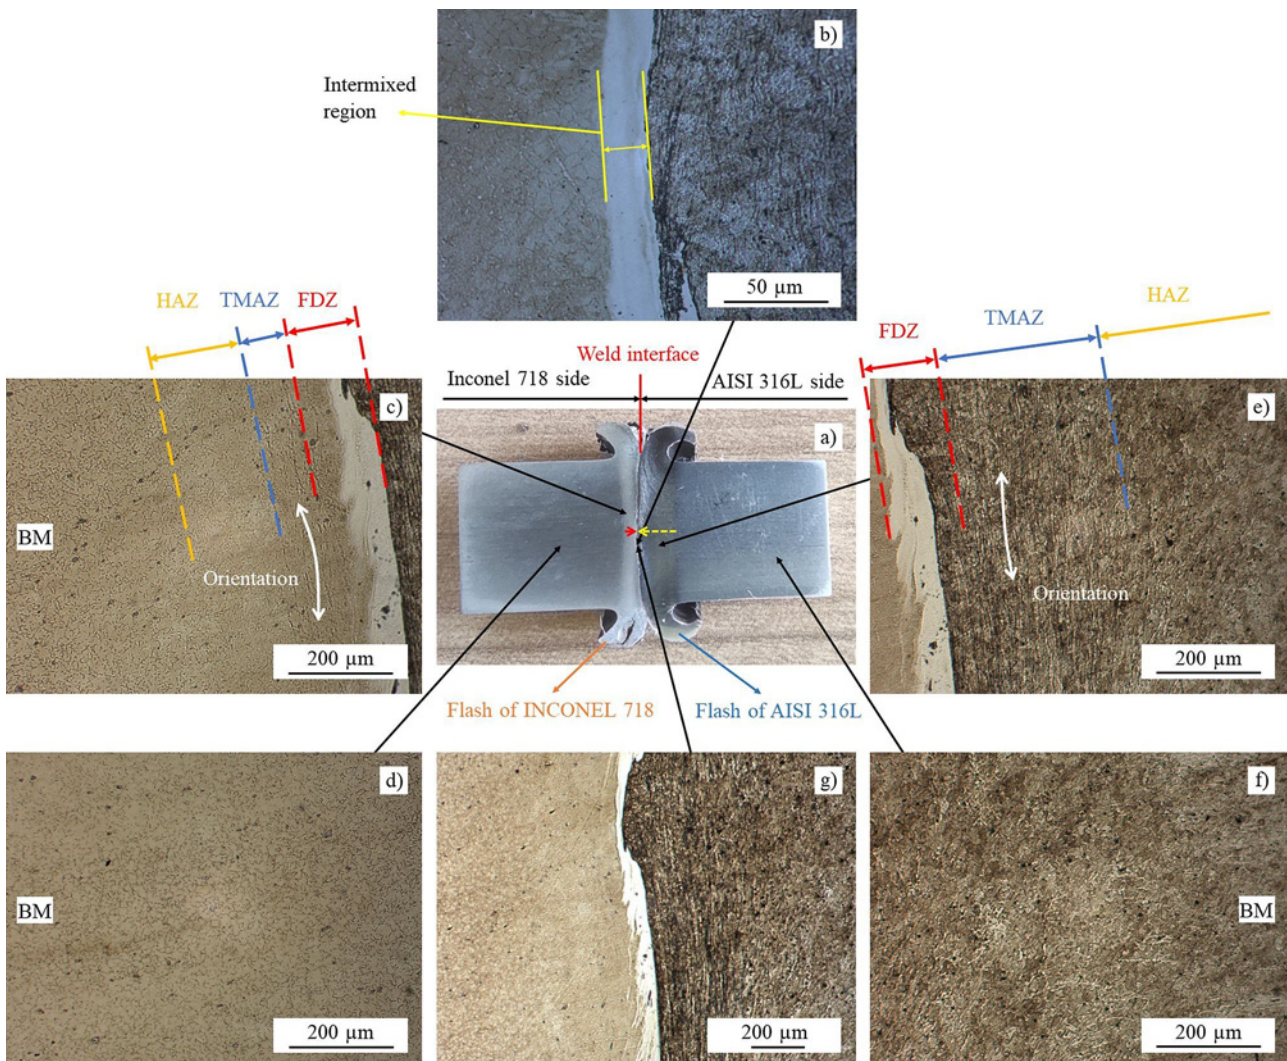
Optical microscope images of S4 (a) cross-section of specimen, (b) 400× magnification of weld interface, (c) welding regions of Inconel 718, (d) 100× magnification of Inconel 718 base metal, (e) welding regions of AISI 316L, (f) 100× magnification of AISI 316L, and (g) 100× magnification of weld interface.
